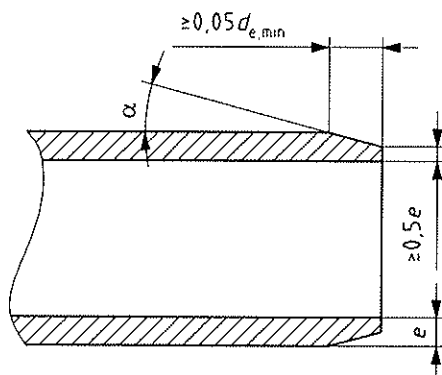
Spigot end for pipes with elastomeric sealing ring
